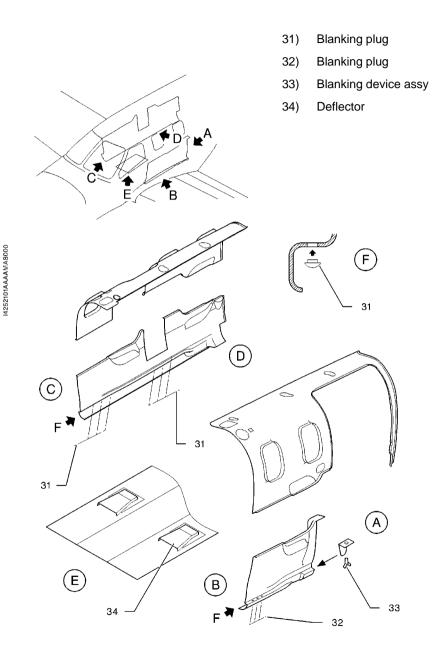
Cabin comfort - Installation of blanking plugs and deflector
